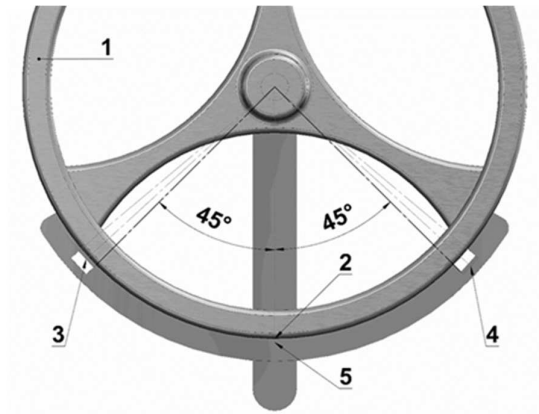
3D solid model of recoil escapement and balance wheel assembly
